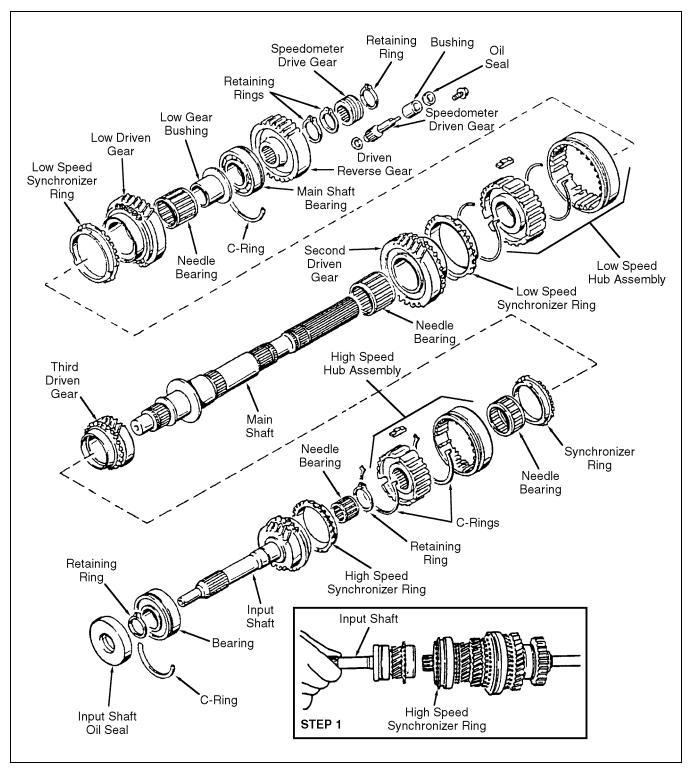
G-9. Input Shaft and Main Shaft ó Steps 1 thru 5
